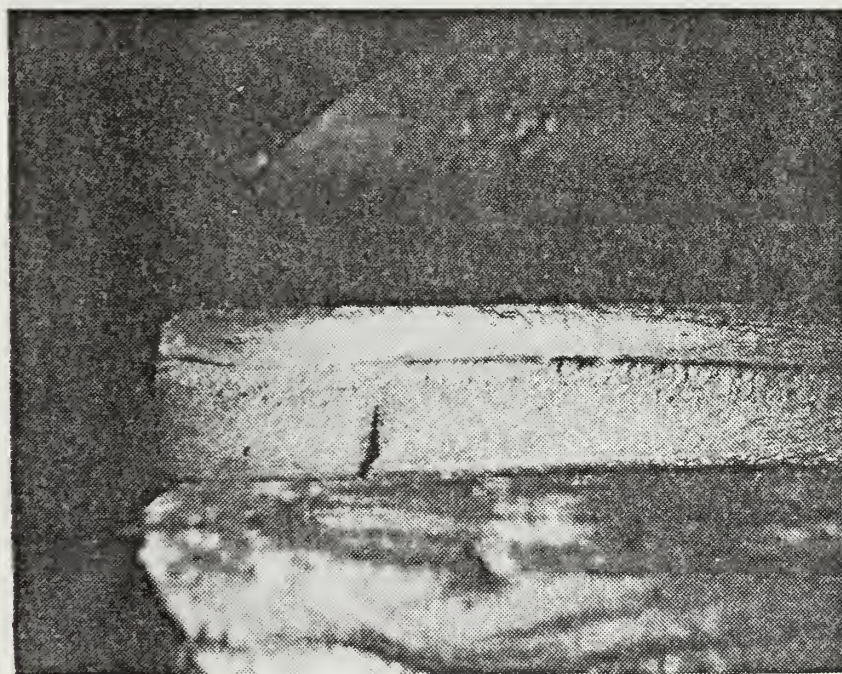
Fatigue fracture surface of specimen AR-4-10, fractured after 100,000 cycles at 66 ksi, showing four initiate sites and intersection of two fatigue zones. X10.
